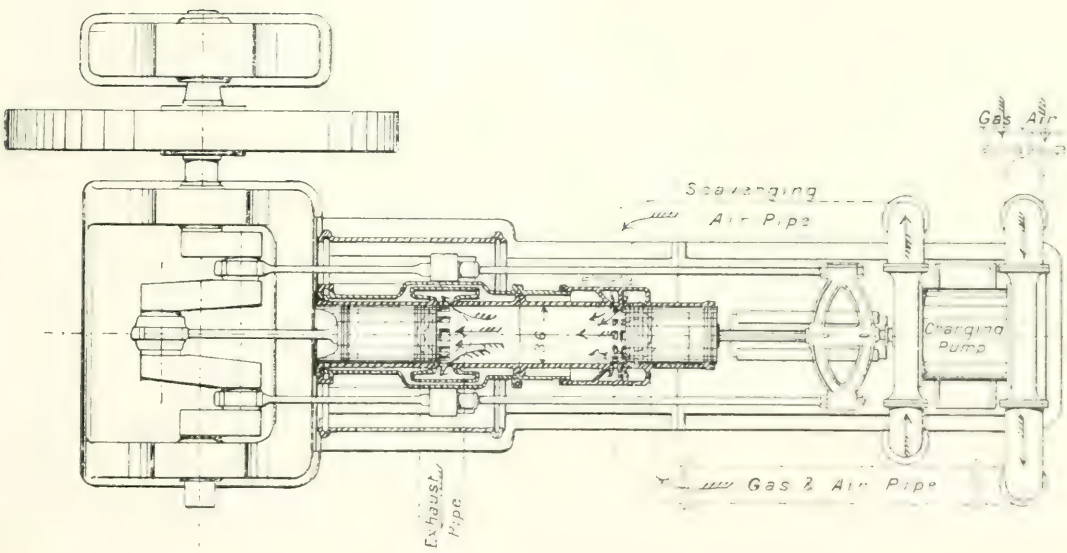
BALANCED-ACTION 1,000-B.H.P. OECHELHAUSER TWO-CYCLE FURNACE-GAS ENGINE.
